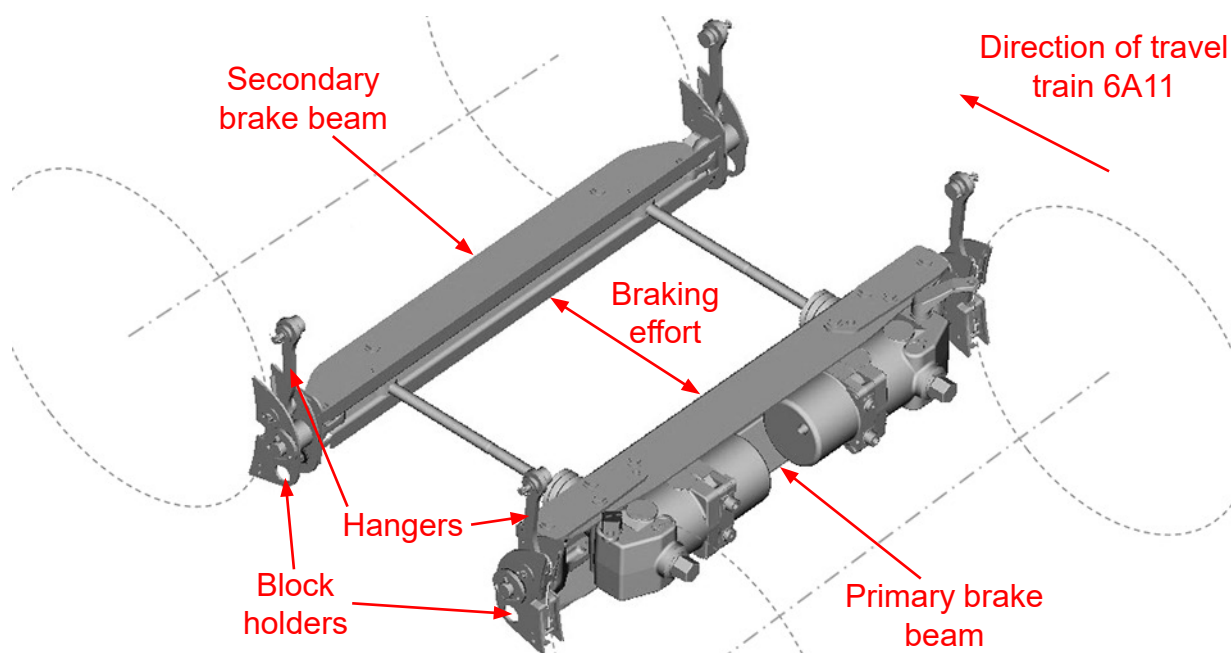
BFCB braking system for one bogie, brake blocks not shown.
